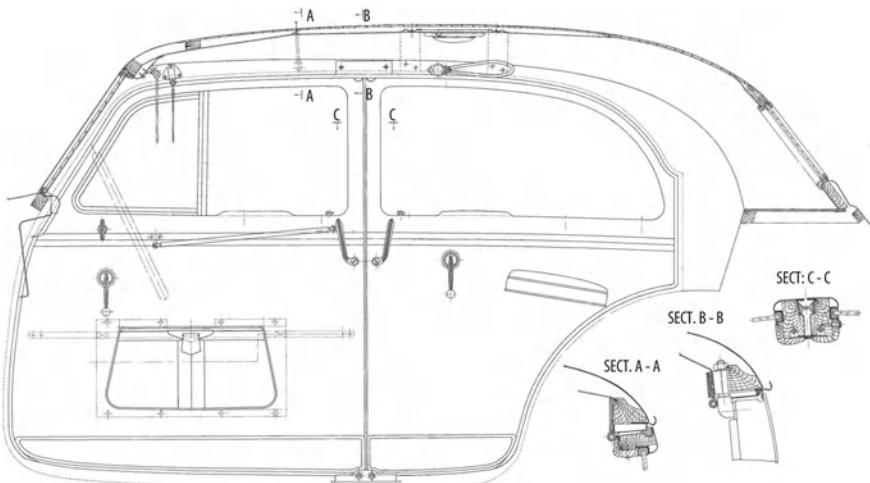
Body structure made with wooden skeleton and steel panels. Notice the wooden elements in cross sections (from Morello et al. 2011)
